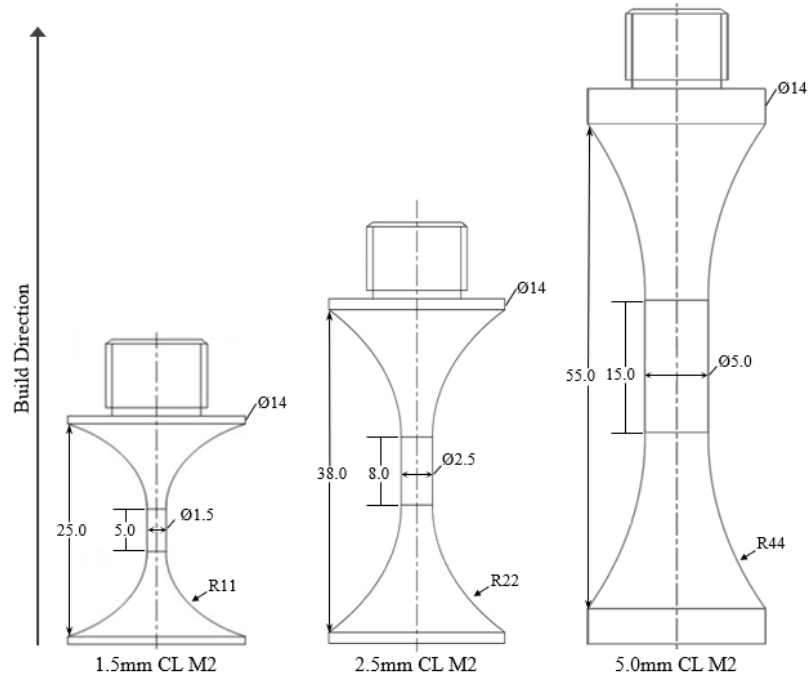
Concept laser M2 specimen geometry for ultrasonic fatigue tests.
